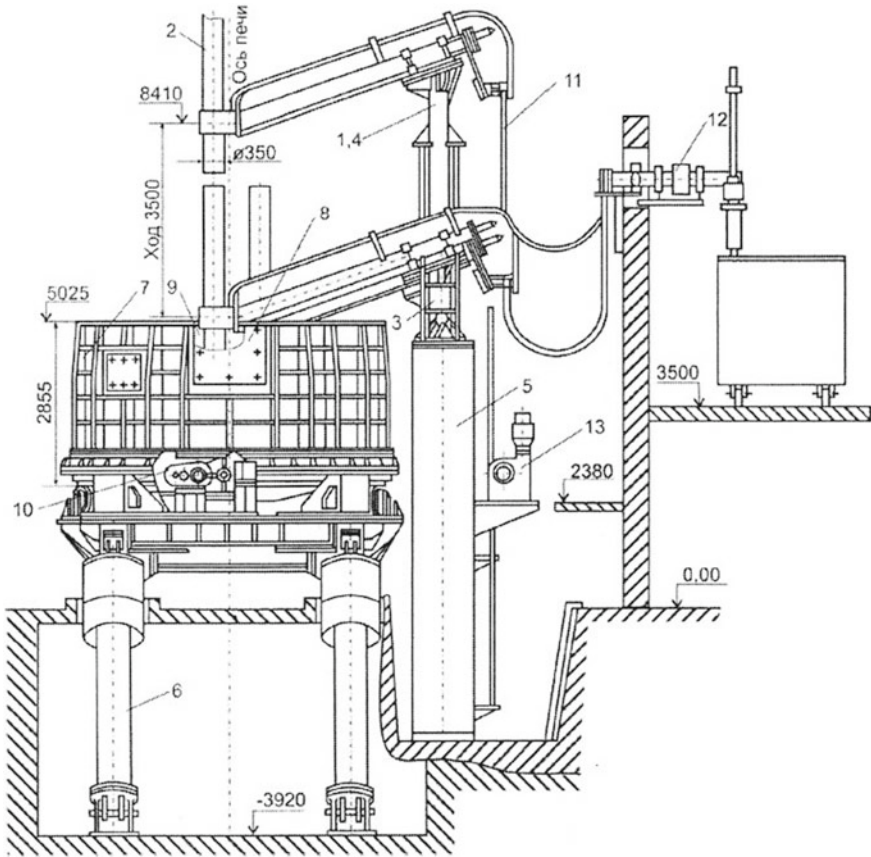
Refining furnace RKO-3,5, 1, 3, 4—columns of the mechanism for moving the electrodes; 2—electrode; 5—shaft columns; 6—mechanism of furnace tilt; 7—a casing; 8—notch; 9—lining; 10—the mechanism of rotation of the bath; 11—flexible cable; 12—short network; 13—drive mechanism for moving the electrodes
